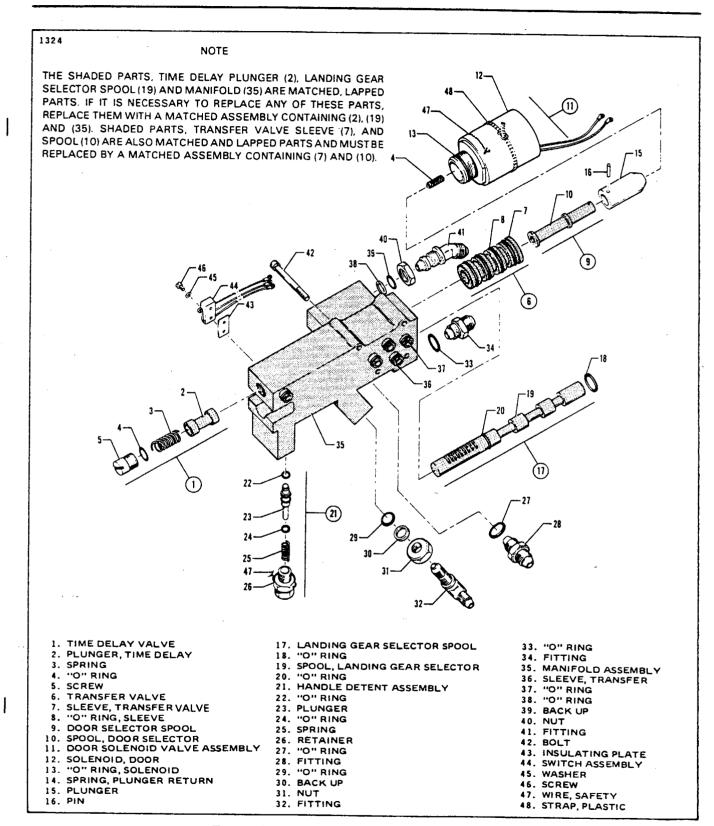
Power Pack Manifold (Wiebel Tool)
